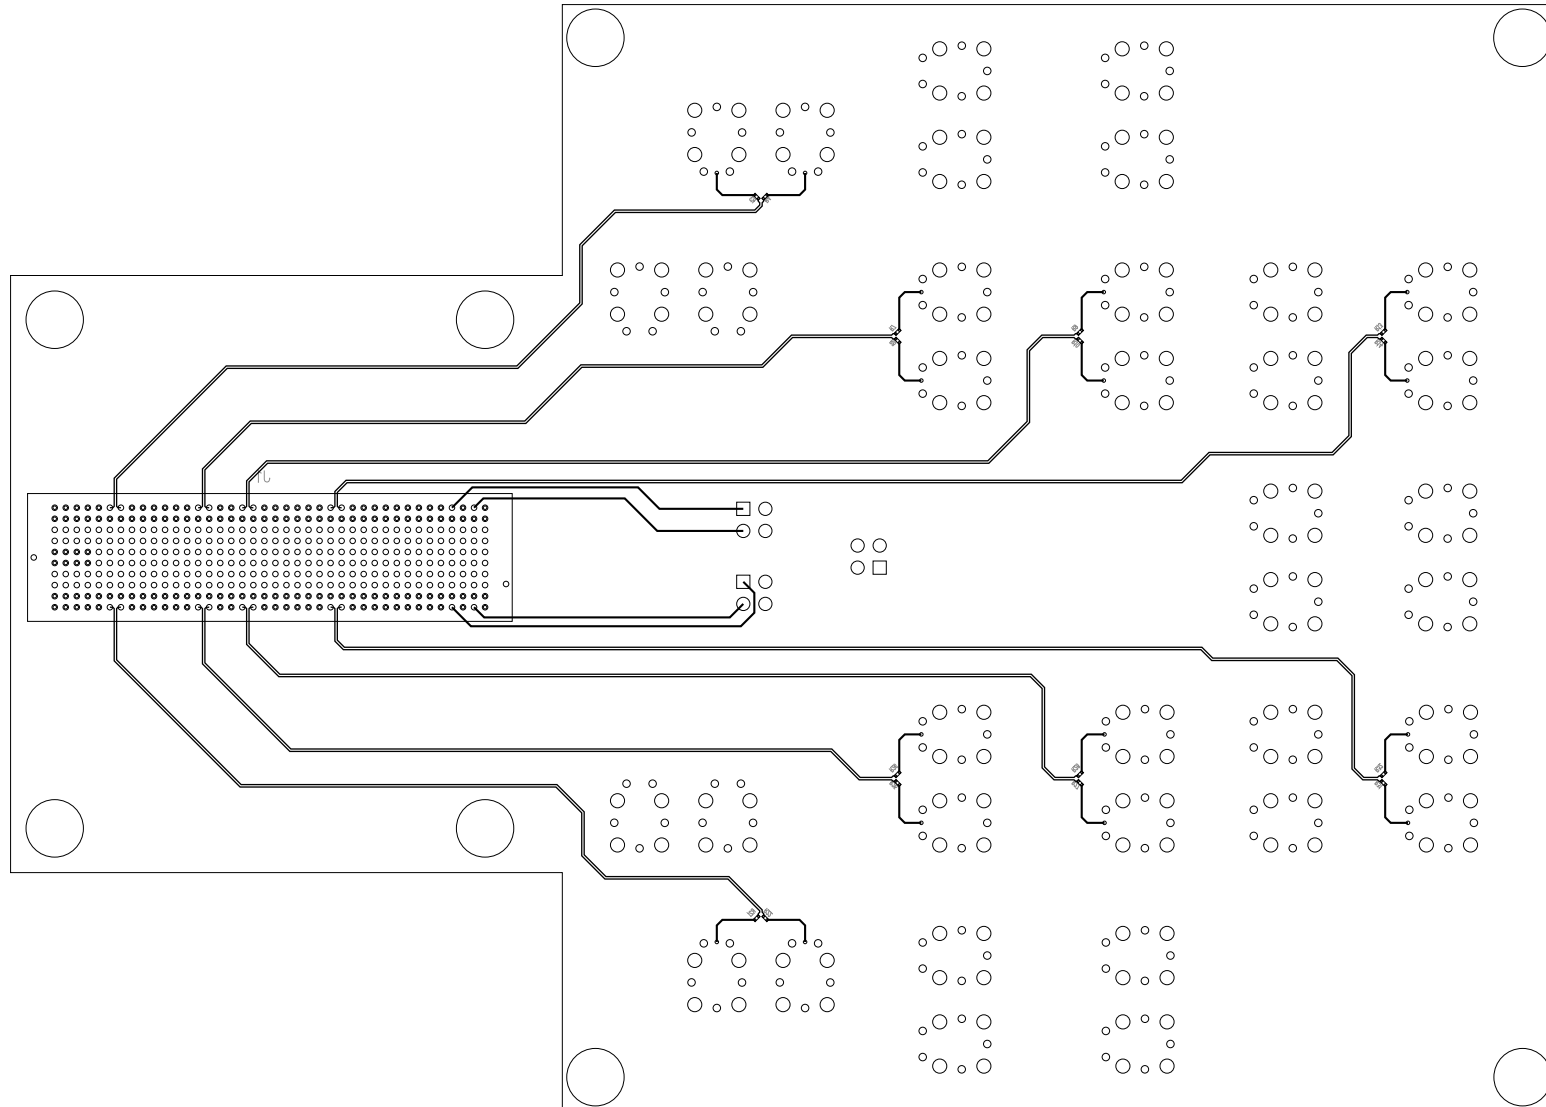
TLK10232 EVM SMA Breakout Board Layout, Bottom Signal (Layers 6)
